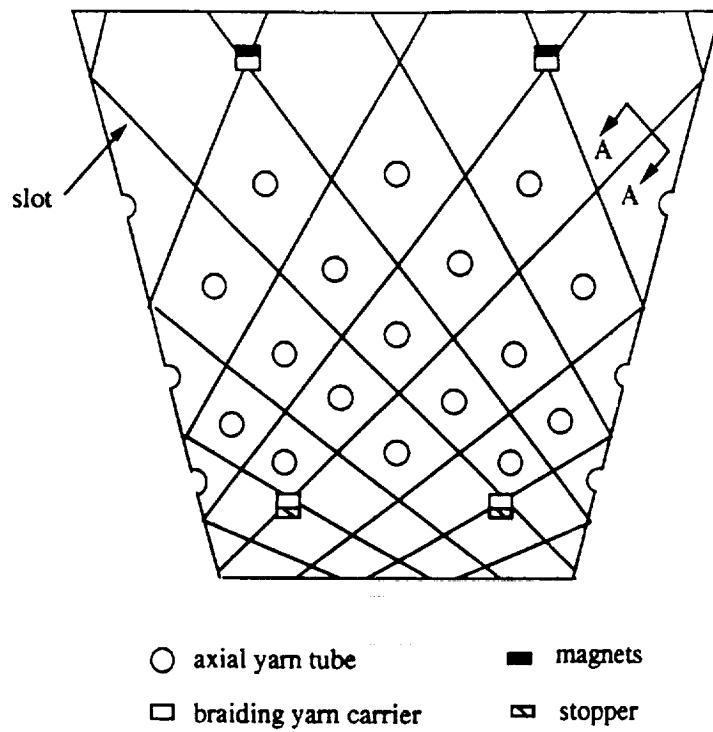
A UNIT TILE OF THE 2-STEP CIRCULAR MACHINE BED
